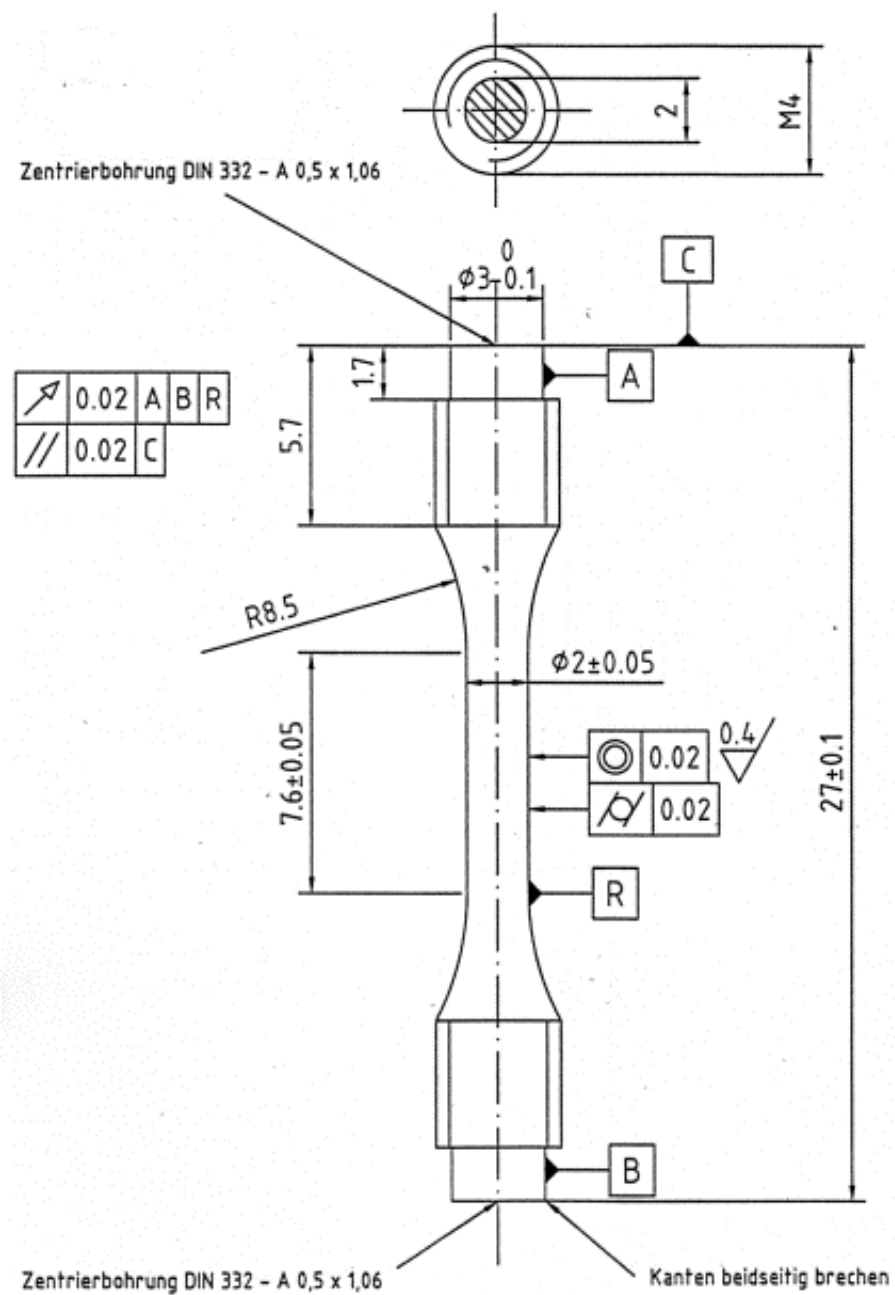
Drawing of a sub-sized specimen for LCF testing
